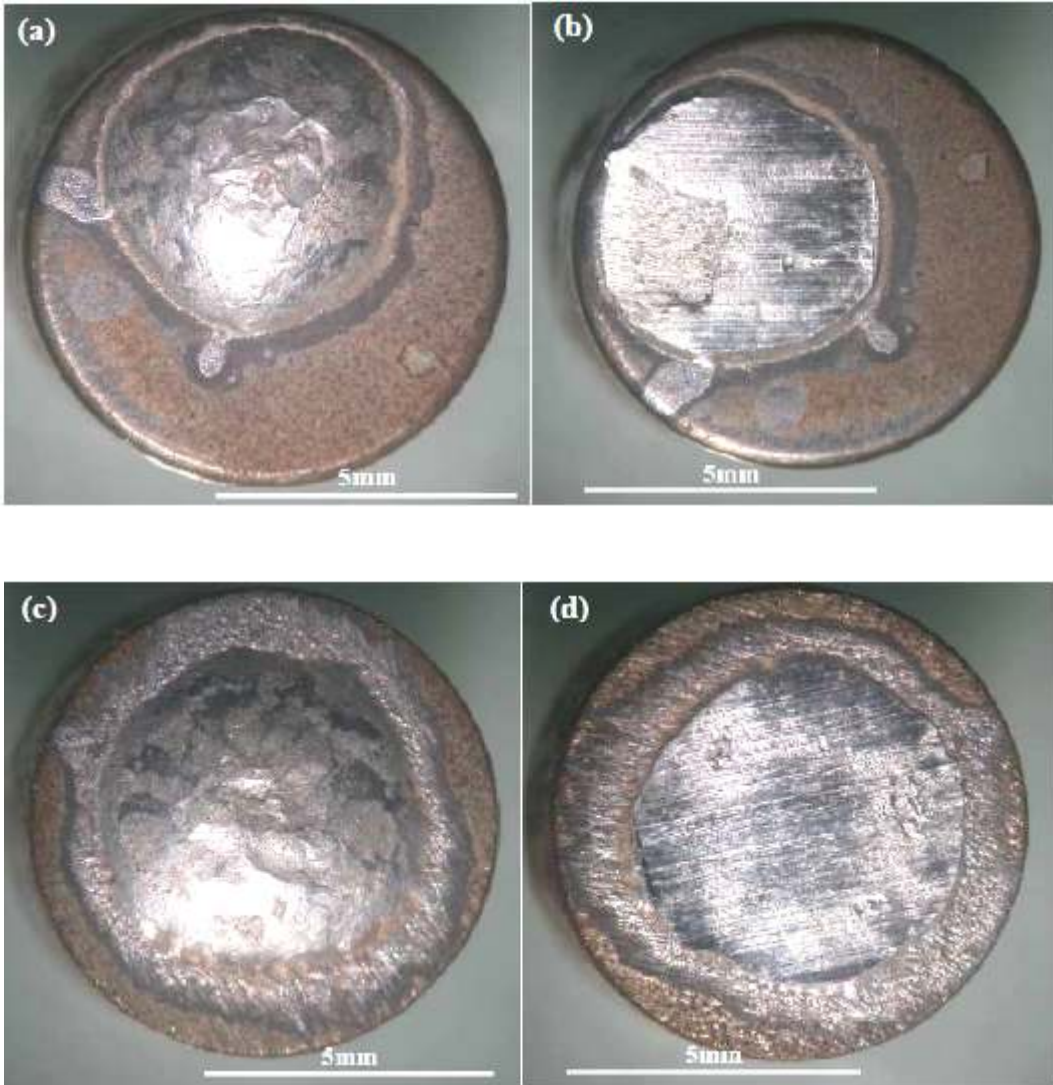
Macroscopic images (top view) of stabilized Sn-0.7Cu solder on (a) smooth Fe-Ni surface (c) rough Fe-Ni surface. Macroscopic images (top view) of sheared Sn-0.7Cu solder on (b) smooth Fe-Ni surface (d) rough Fe-Ni surface
